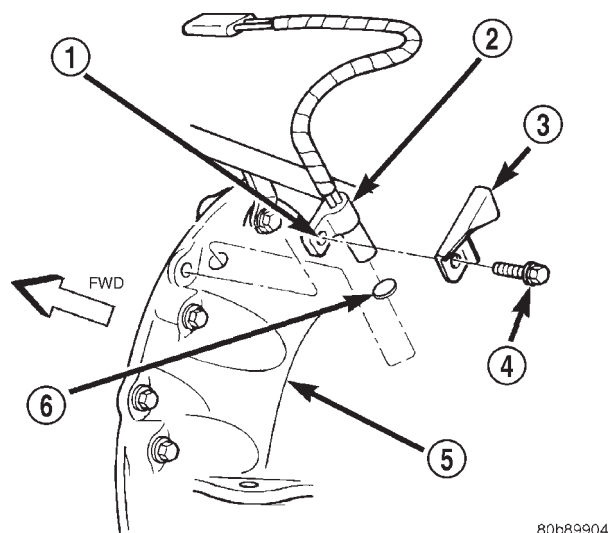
CKP Sensor Operation—4.0L 6-Cyl. Engine
